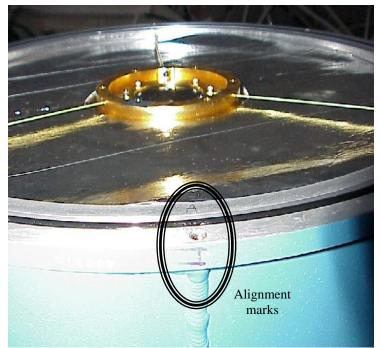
Alignment of centering fixture ('A') and vacuum shell (vertical weld).
